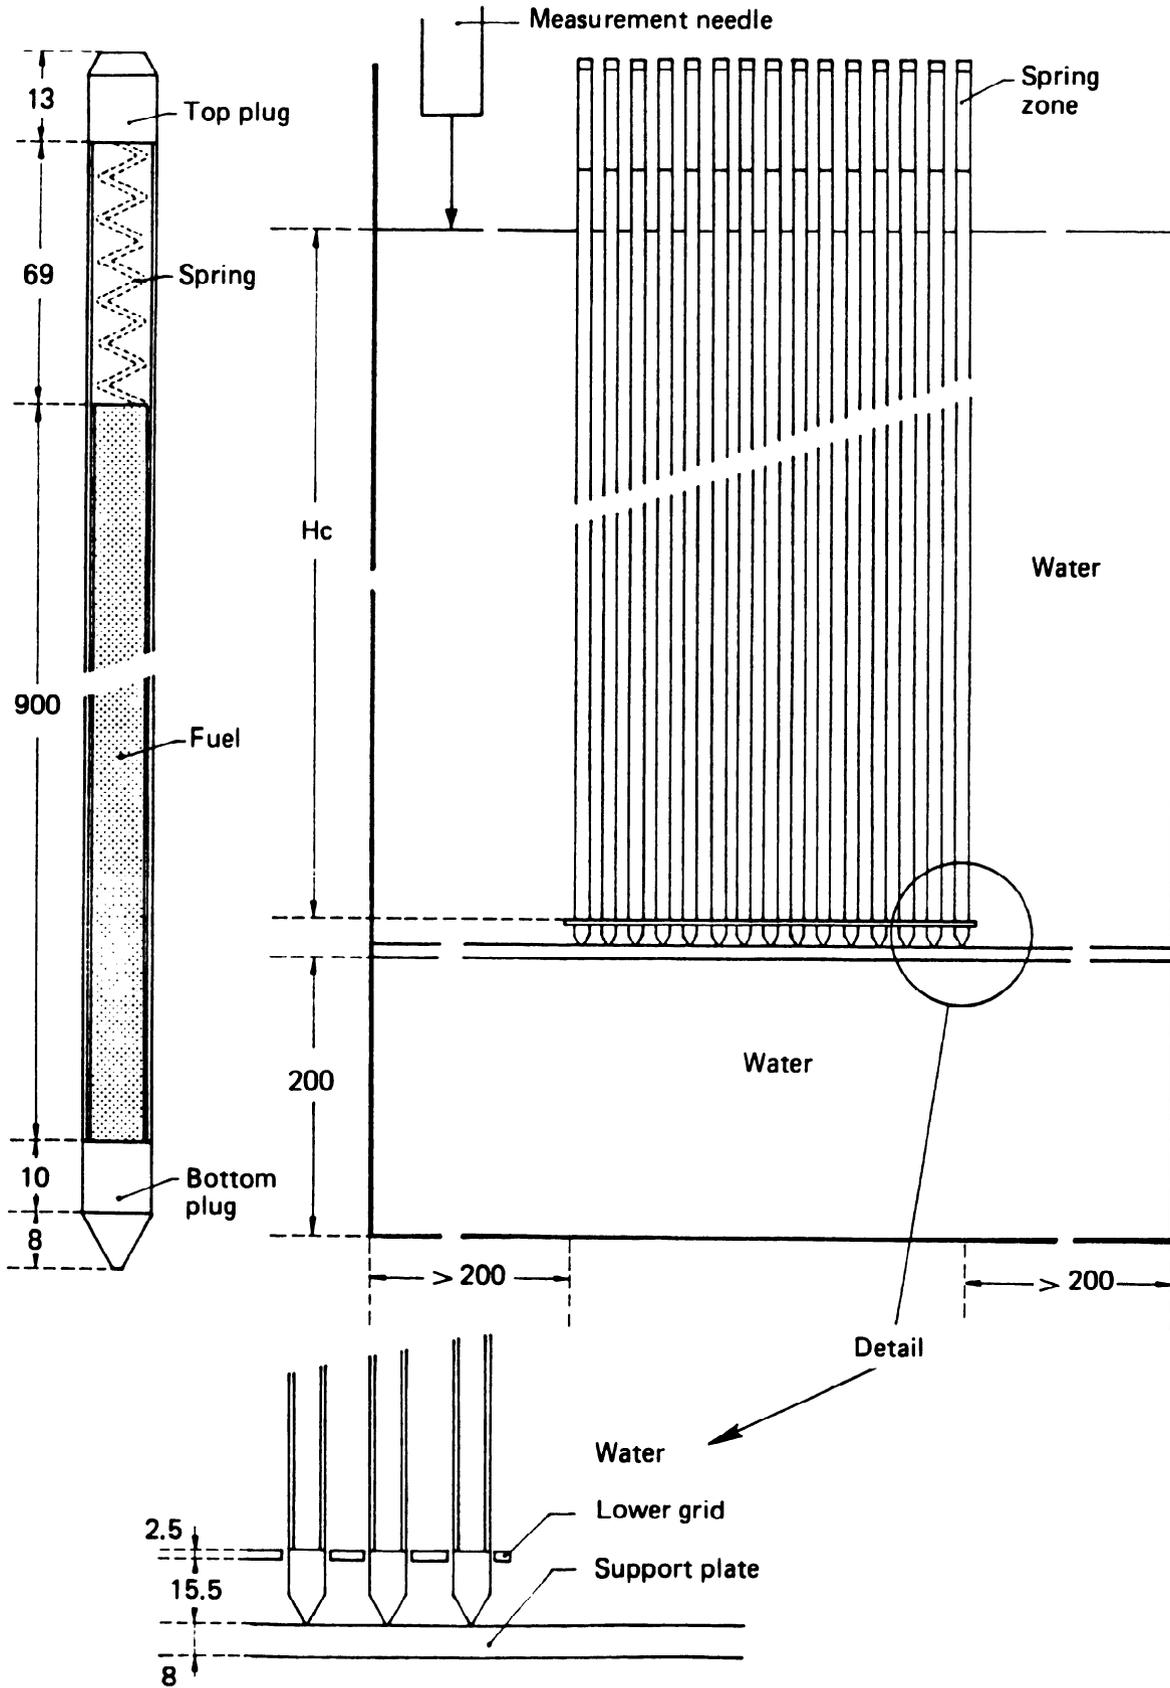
Principal dimensions of the fuel rods and their assembly (in millimetres).
